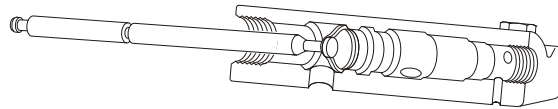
Insert bumper hook through center of bumper and pull straight out.
